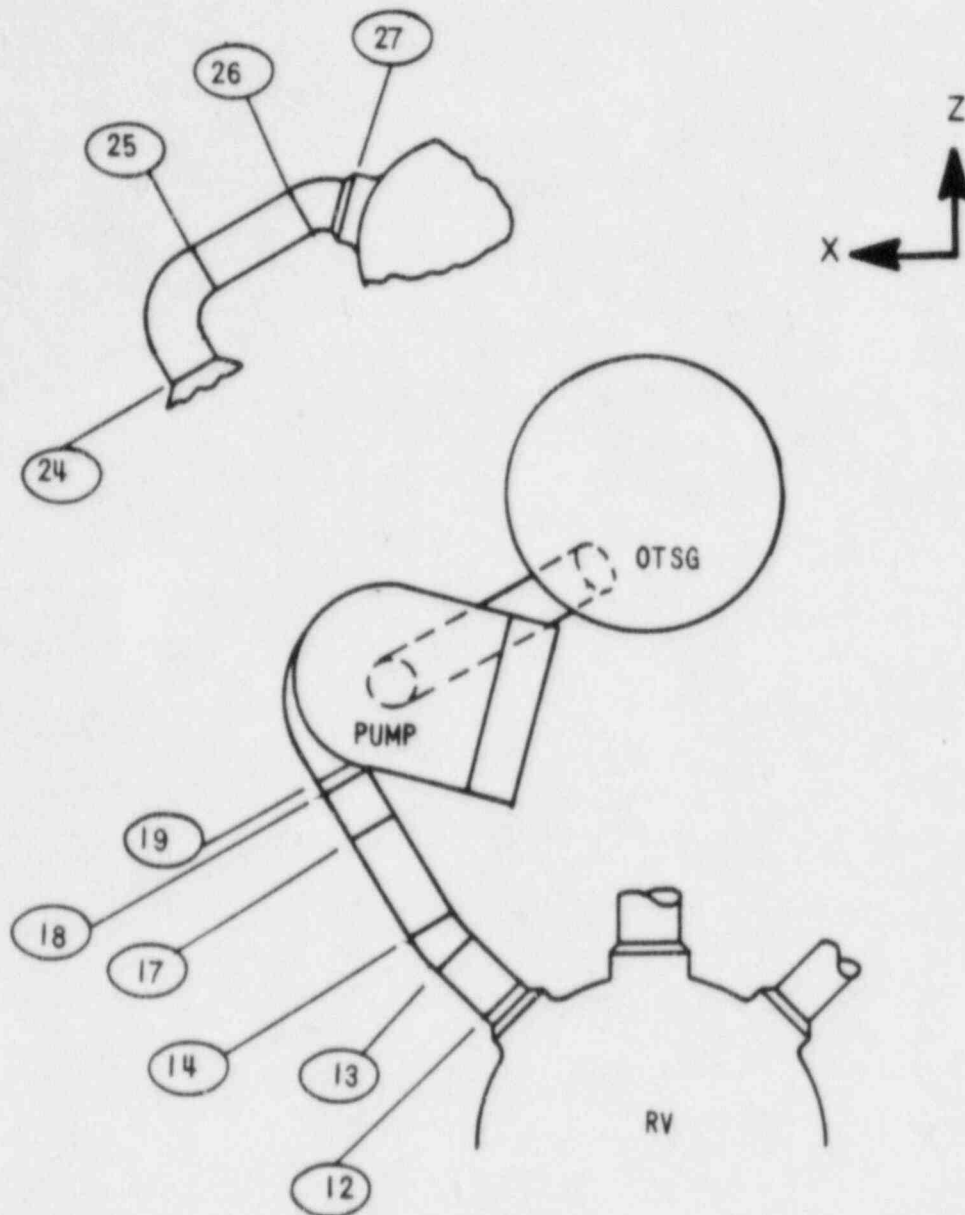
177-FA Plant Lower Loop Hot Leg Weld Locations
